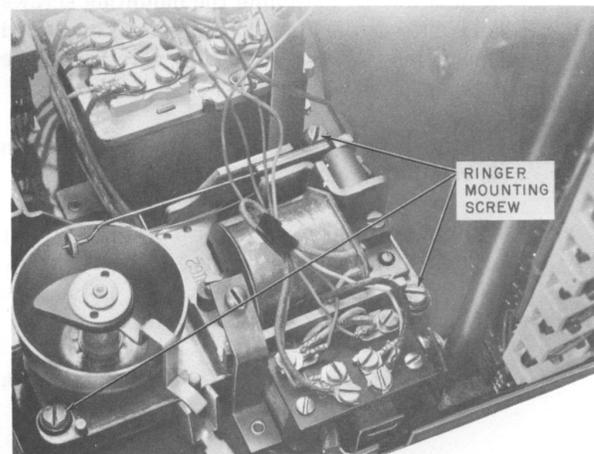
Location of Mounting Screws for D1-Type Ringers
